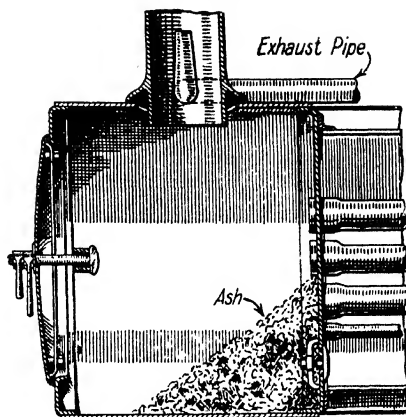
SECTION OF SMOKE-BOX OF LOCO-TYPE BOILER
